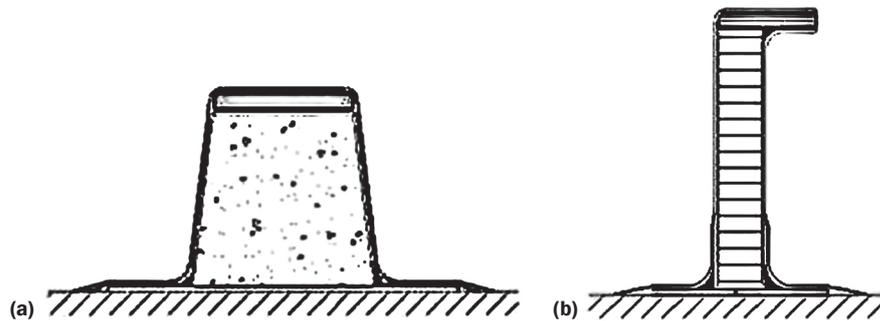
Typical moulded beam cross-sections, hat-section (a) and L-flange (b)
